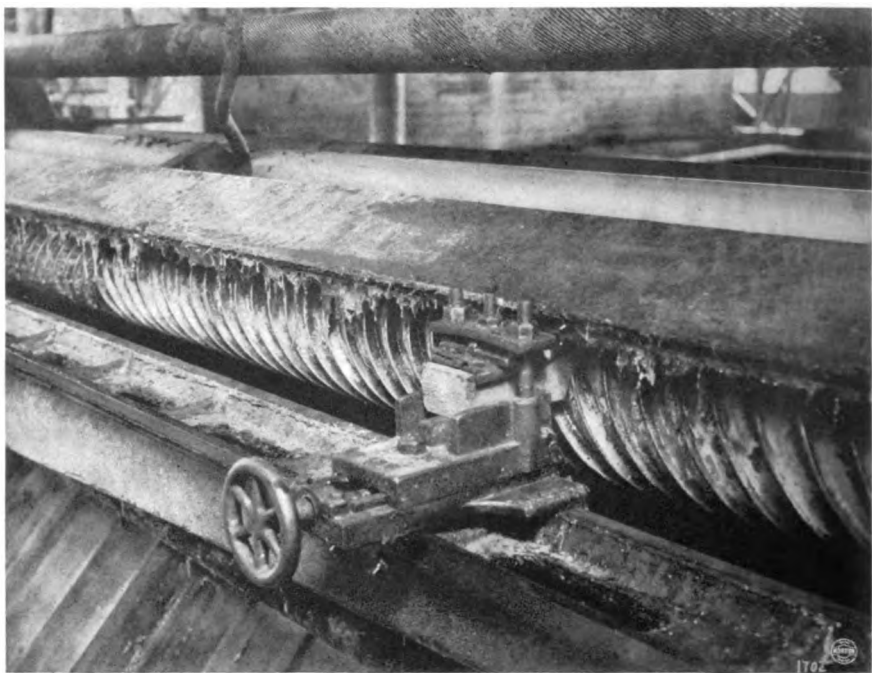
Fleshing Machine Showing Method of Sharpening Cutters with an Alundum Brick
